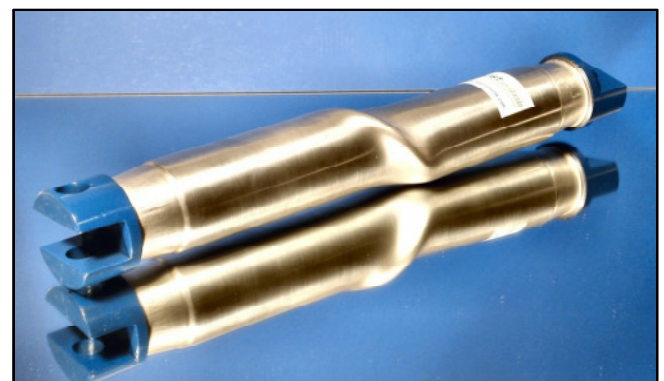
EMPT welding of steel end pieces into a lightweight aluminium drive shaft
